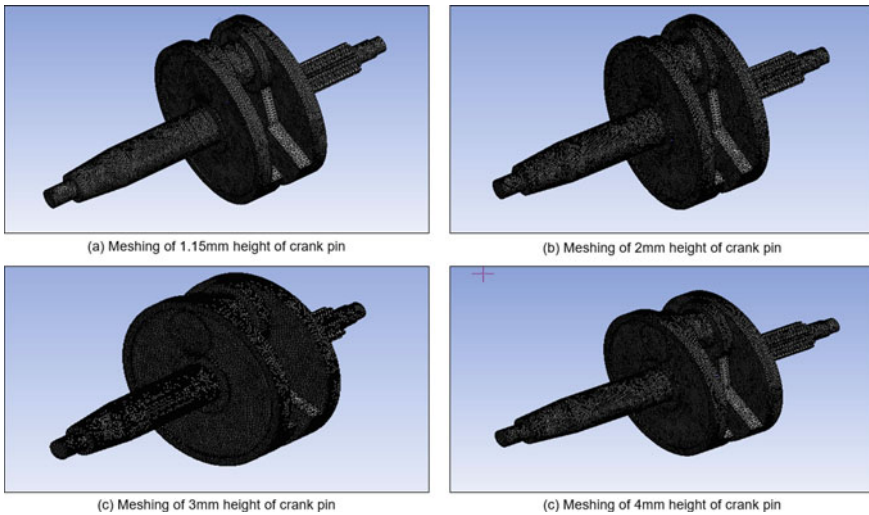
Meshing of single-cylinder engine crankshaft
